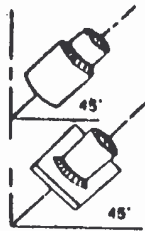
Positions of Test Pipe or Tubing for Groove Welds
